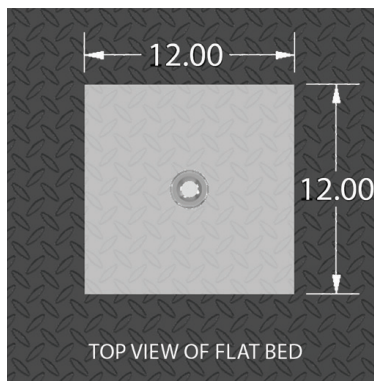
Top View: Recommended that Shift Lock & Demco coupler have a minimum clearance of 12" x 12"
